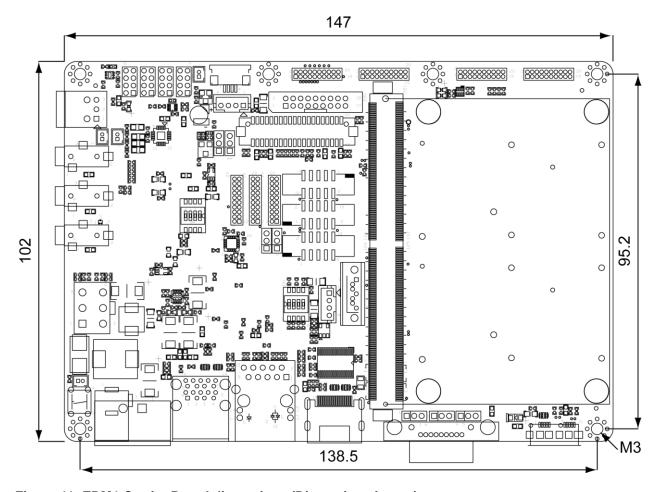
EDM1 Carrier Board dimensions (Dimensions in mm)
